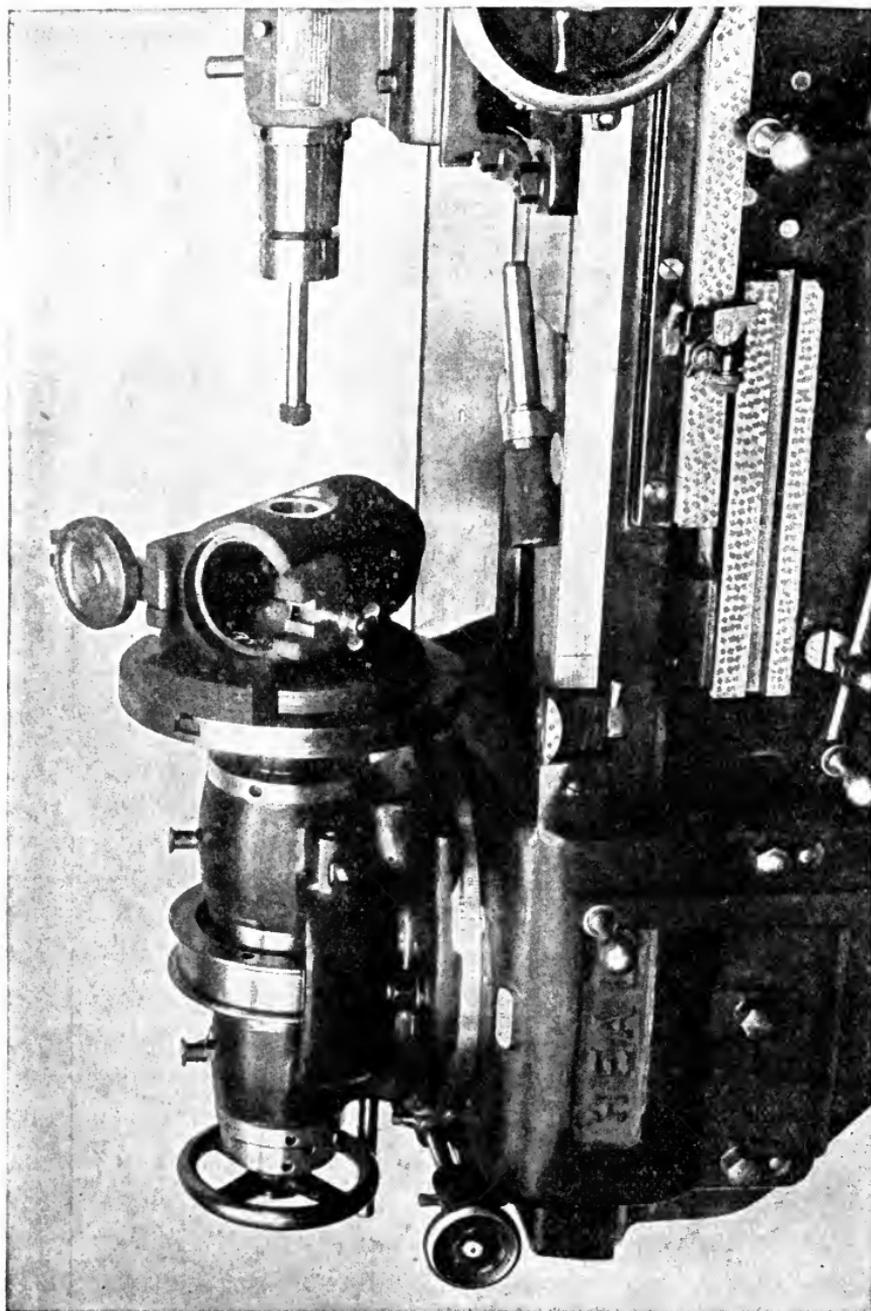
Set-Up for Grinding Wrist-Pin Bearing; Grinding Time 3 Minutes per Piston
